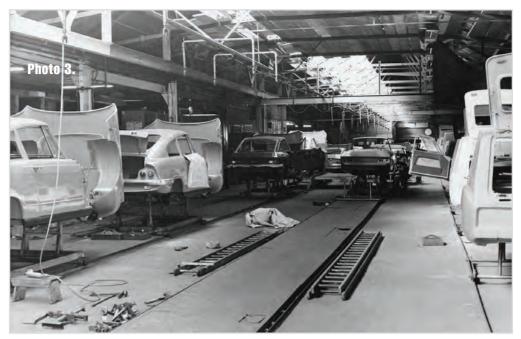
Now in Ribbleton Lane, showing three 1300 4s, two 2 Litre Coupes and a Convertible and 875 3-wheelers under construction. The furthest 1300 4s would appear to be almost complete with bumpers fitted and on its wheels. In
